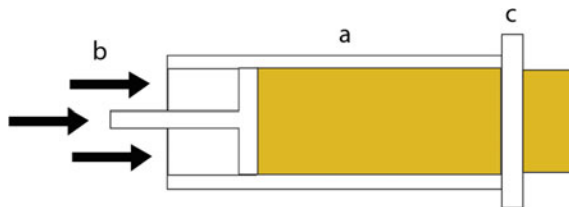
Extrusion mechanism: a cube, b pressure, and c placement of output which is the die
